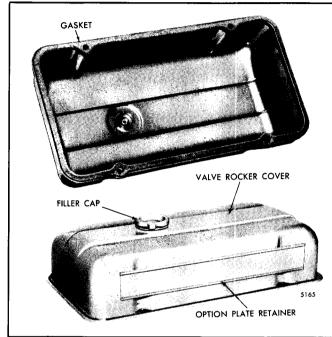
Typical Stamped Steel Valve Rocker Cover Assembly
